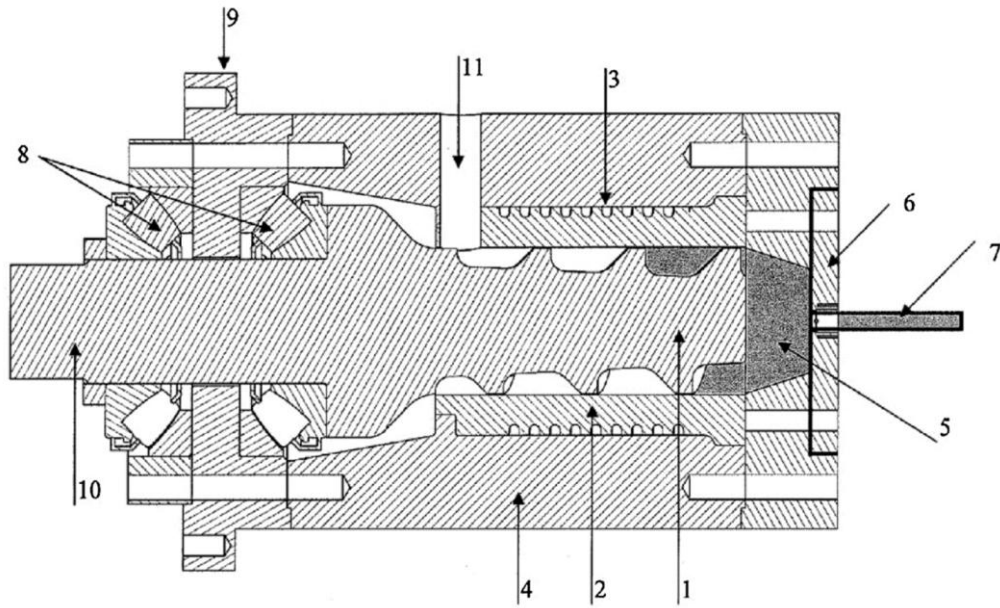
Schematic illustration of the cross-sectional view of an extruder. (1) screw, (2) liner, (3) cooling channel, (4) screw housing, (5) extrusion chamber, (6) die, (7) extruded product, (8) thrust bearing, (9) support plate, (10) screw shaft, (11) inlet [20].
